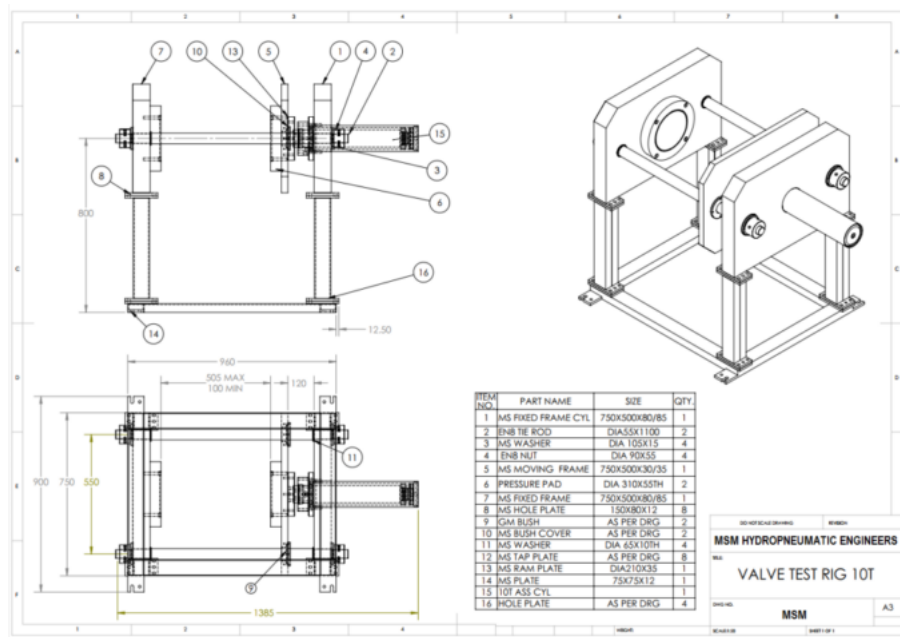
2D Model assembly view of 10MT valve testing equipment.
